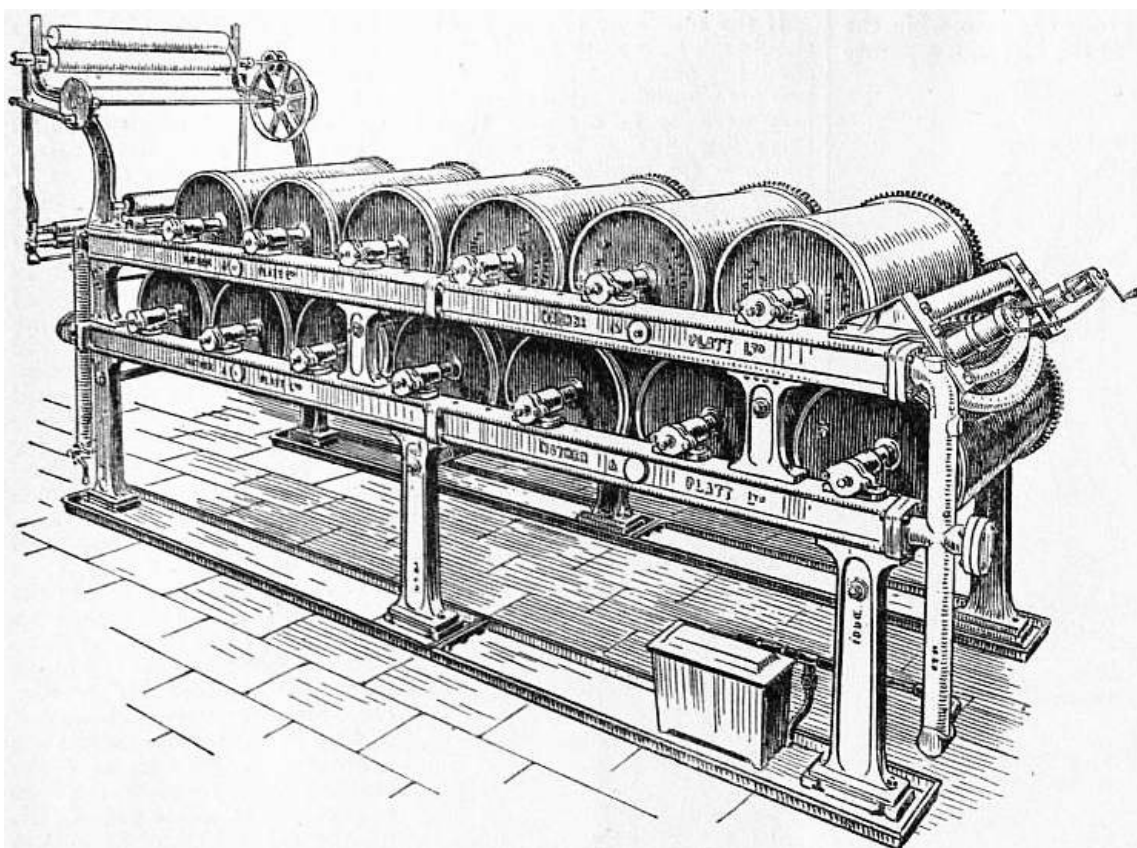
Mather & Platt's Horizontal Drying Machine.
